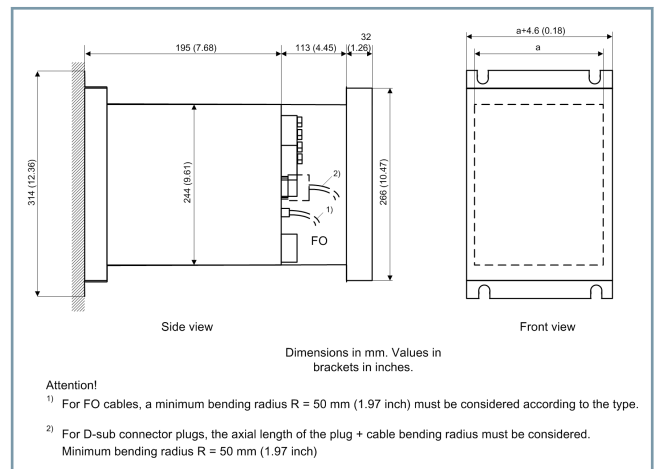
/4 Flush-Mounting Devices, Dimensions from the Side and Front Views
